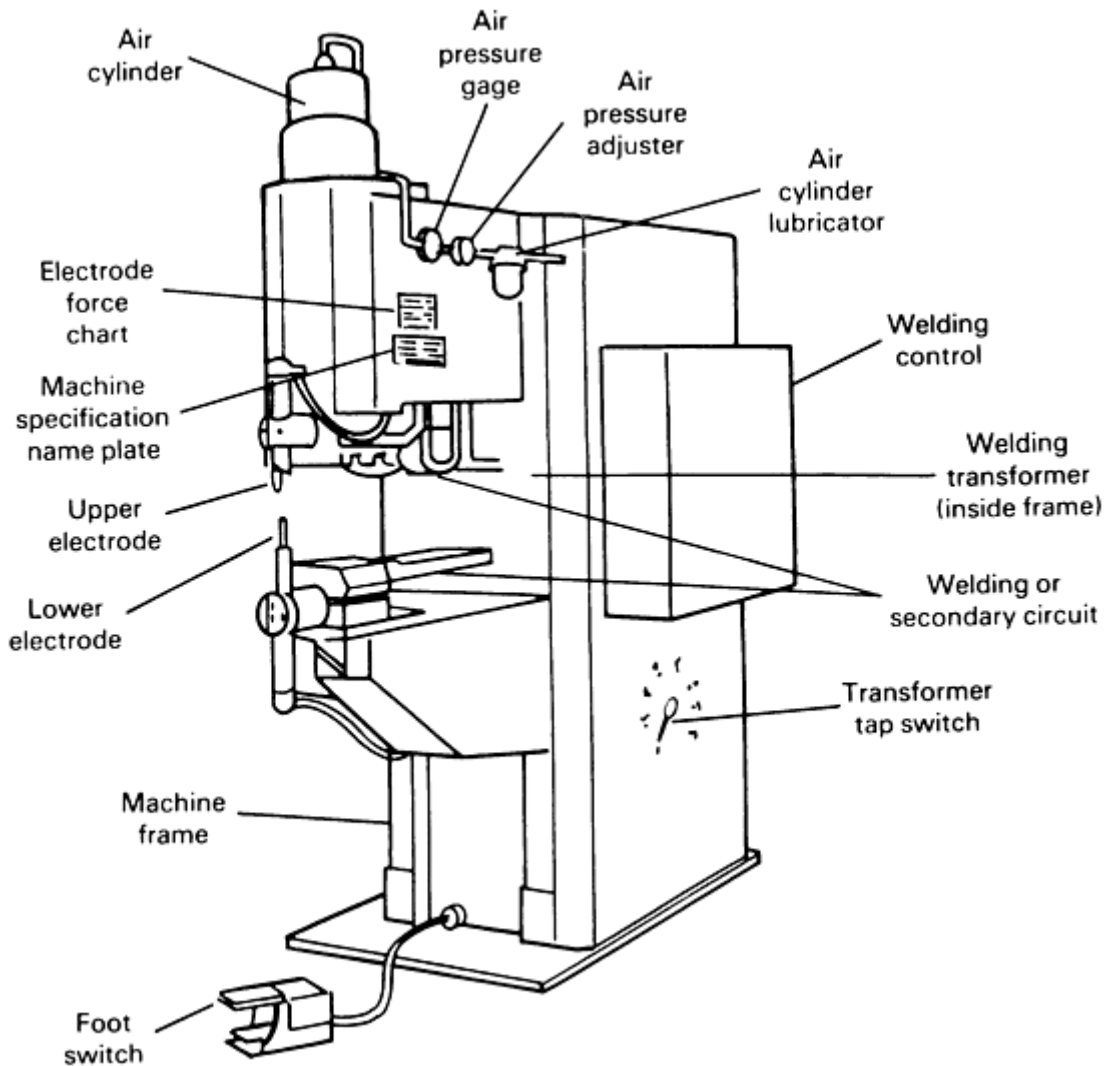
SCHEMATIC SHOWING PRIMARY COMPONENTS OF A RESISTANCE WELDING MACHINE
